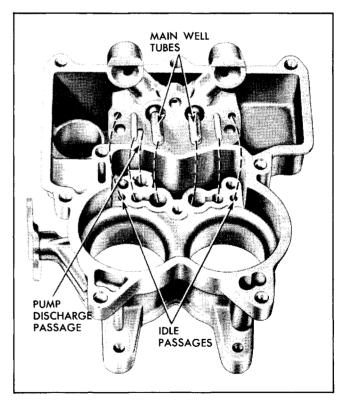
B-76 Passage Identification—Bowl to Cluster Assembly
